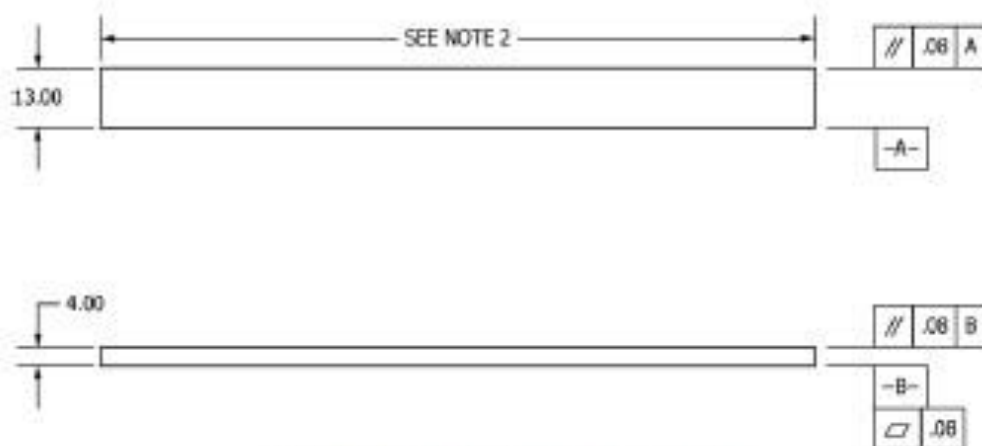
Standard Flexural Test Specimen Drawing (SI)
